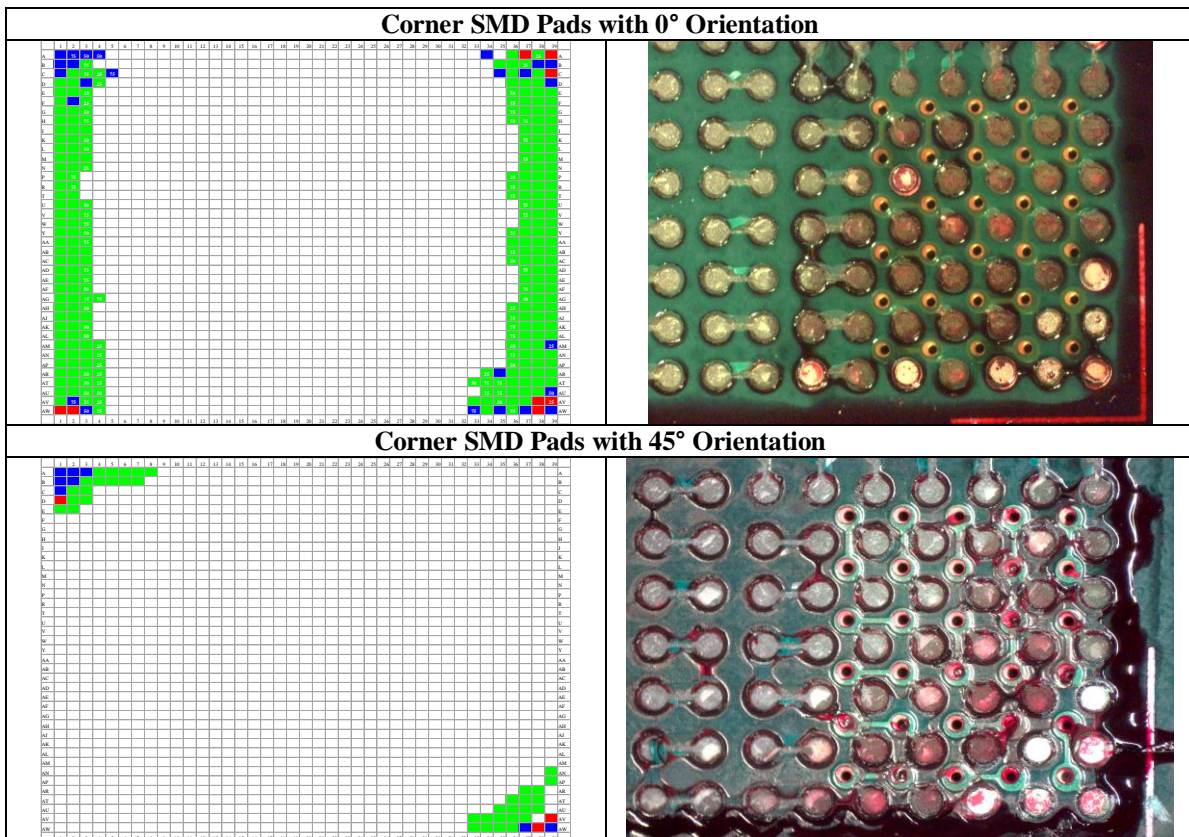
Typical Dye and Pry Result with Full NSMD Pads (Blue – BGA Side IMC Fracture, Red – PCB Side IMC Fracture, Green - PCB Pad Cratering)
